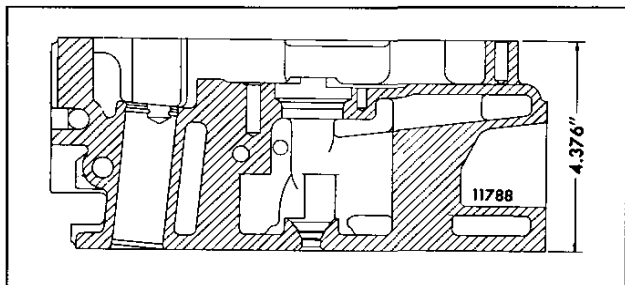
Minimum Distance Between Top and Bottom Faces of Cylinder Head
